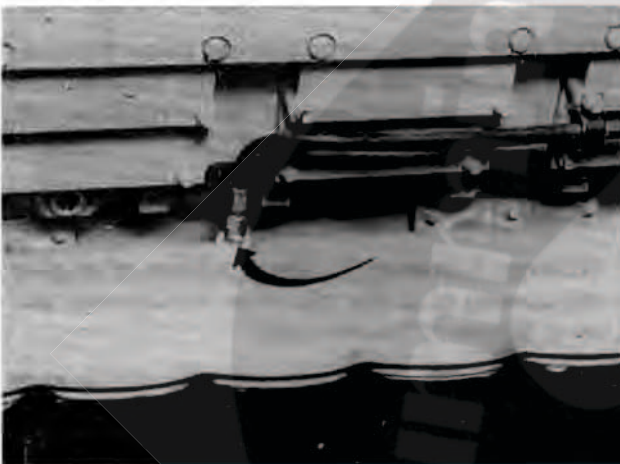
, (OM202). Lubricating system priming point — KTA50
